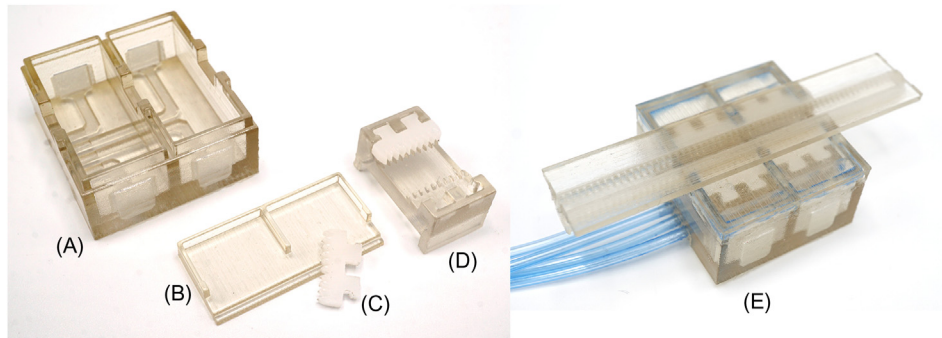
Realization of small-step two-cylinder linear stepper motor: (A) housing, (B) one cap, (C) laser-cut teeth piece, (D) piston with one teeth piece inserted, and (E) assembled motor.
